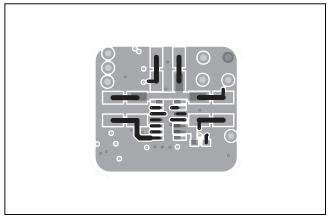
MAX30105 Daughter Board Component Placement Guide—Solder Side
